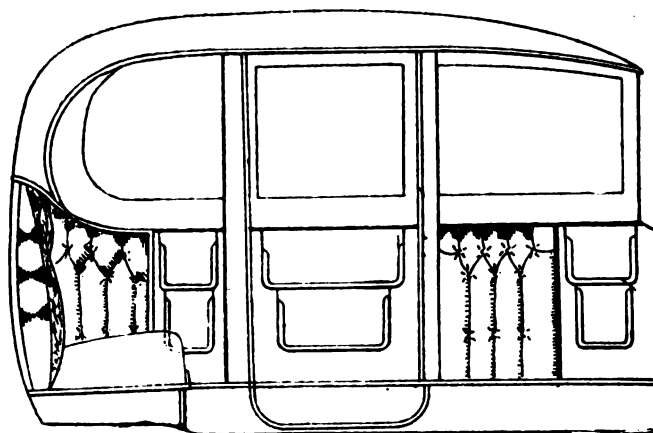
Sketch showing the type of upholstery and car described herewith, a rounded corner limousine.
